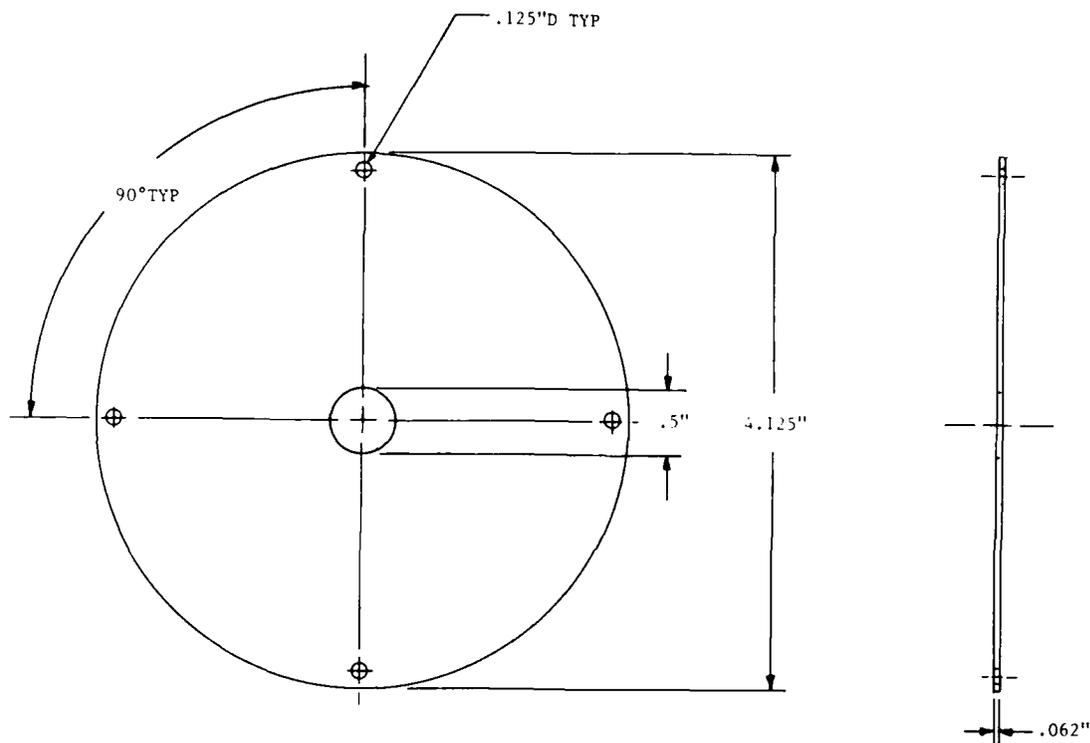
Laser tube baffle plate; unless otherwise specified, tolerances are  $\pm .002$
